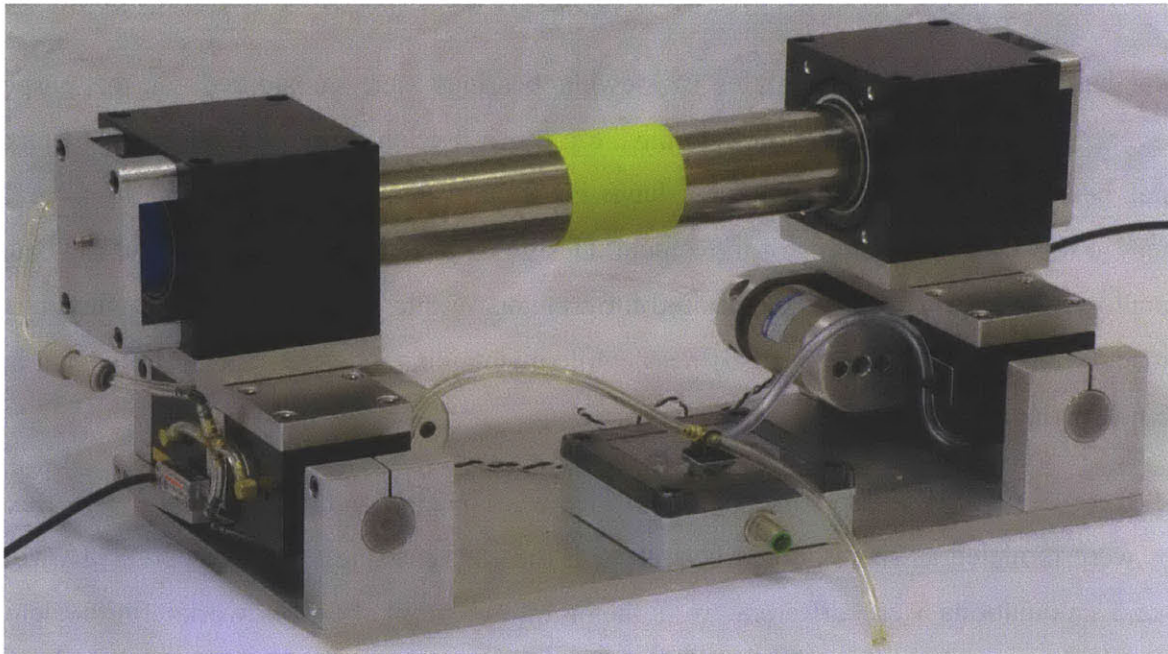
Print head construction: Photo of the complete print head assembly. Note the addition of the voice coil electrical distribution box and the air hoses used to supply the air bearings with pressurized air. These hoses were chosen to be soft and compliant, and they were routed in a way that their stiffness would have the least effect on the print head.
